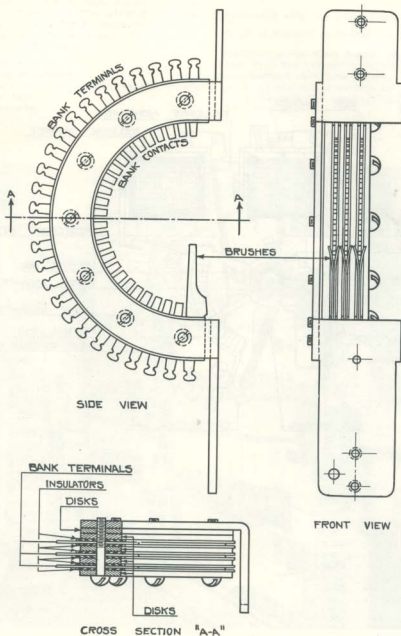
ROTARY SWITCH BANK ASSEMBLY
